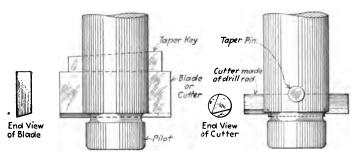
Two types of home-made counterbores with removable blades or cutters.
